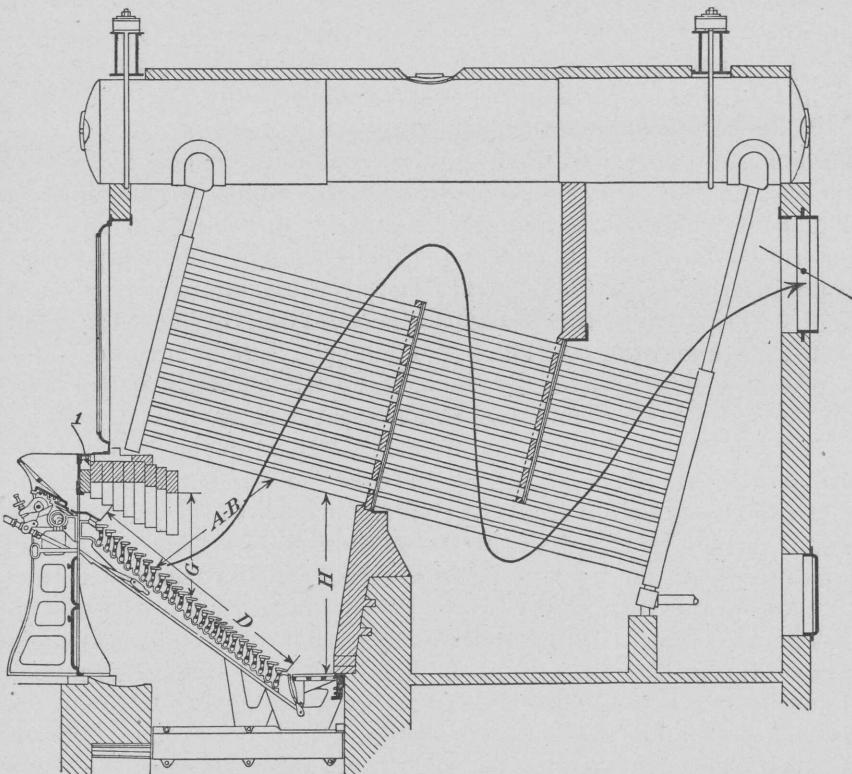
Front-feed stoker and Babcock & Wilcox boiler, usual setting. 1, Air space; steam jets enter furnace at this point.
